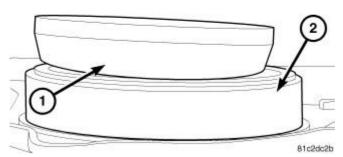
REAR SEAL INSTALLED Courtesy of CHRYSLER LLC
